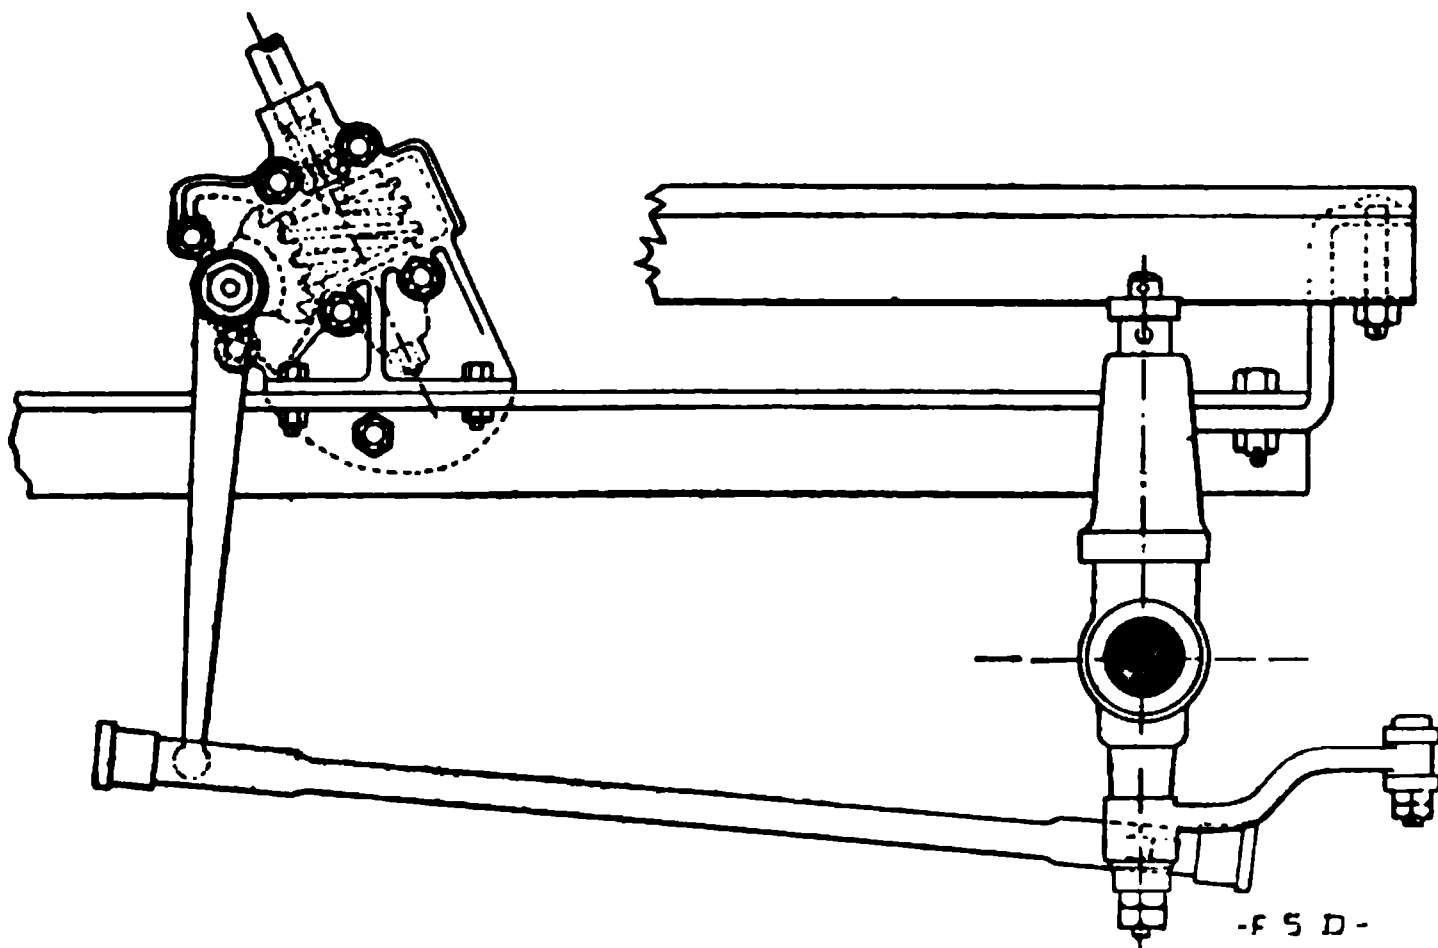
Steering Connections of the Panhard Carriages. The spindle of the steering hand wheel carries a worm gear at its base, which actuates a toothed sector, as shown. This swings an arm and moves the drag-link attached to the arm at the base of the steering head. The transverse drag-link connecting the two steering heads is attached to the arm extending from the front of the carriage. The link between the steering head and the sector arm has ball joints and can adjust the distance as the carriage rises and falls on the springs.
